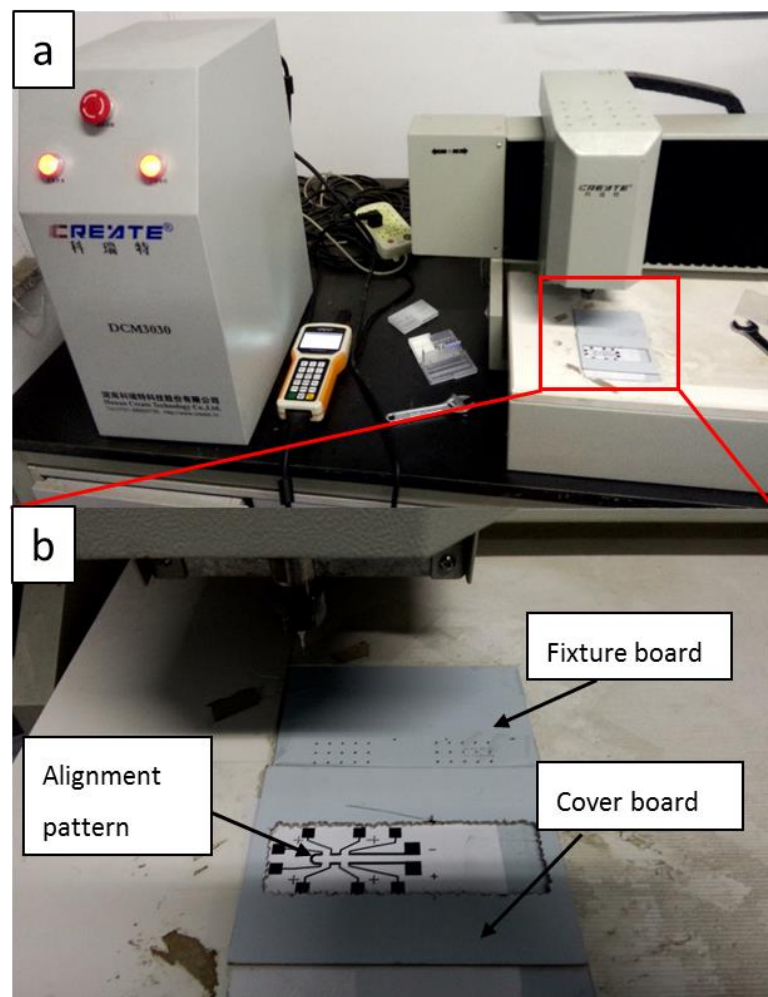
12 a) Numerical control drilling machine, b) a close look at fixture board
